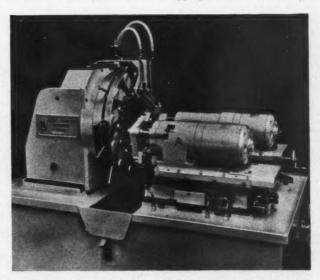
This Slack & Parr unit head machine is designed for drilling and tapping 4 B.A. by ½-in. deep holes in pistons for disc brakes. Interchangeable work fixtures are provided for handling parts of different sizes, and separate sets of cutter spindles on the unit heads can be brought into use for drilling and tapping holes at a centre distance of ½ or ½ in.
